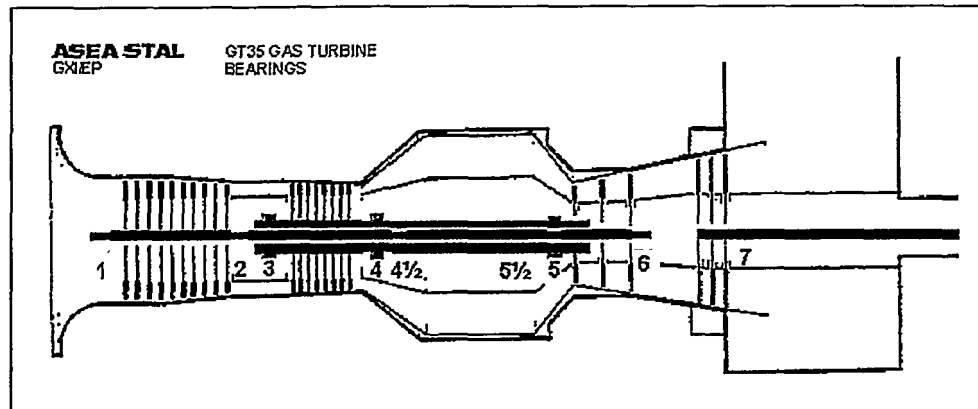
Multi shaft rotor with a hot "center" bearing, e.g. bearing no 5
